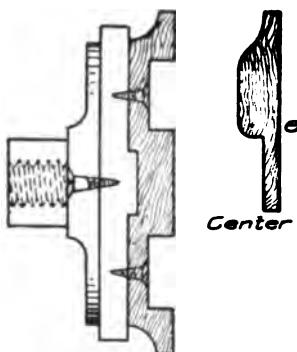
Method of Mounting Sheave Pattern on Wood Faceplate
